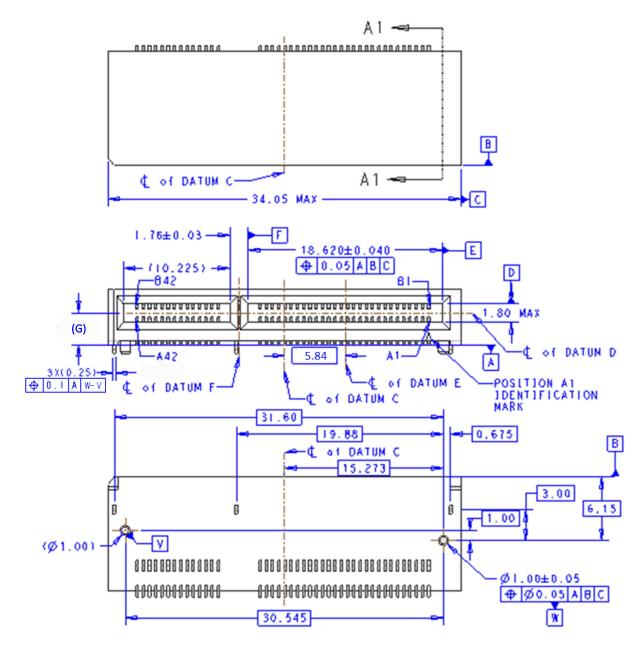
2C RIGHT ANGLE CONNECTOR DIMENSIONS
